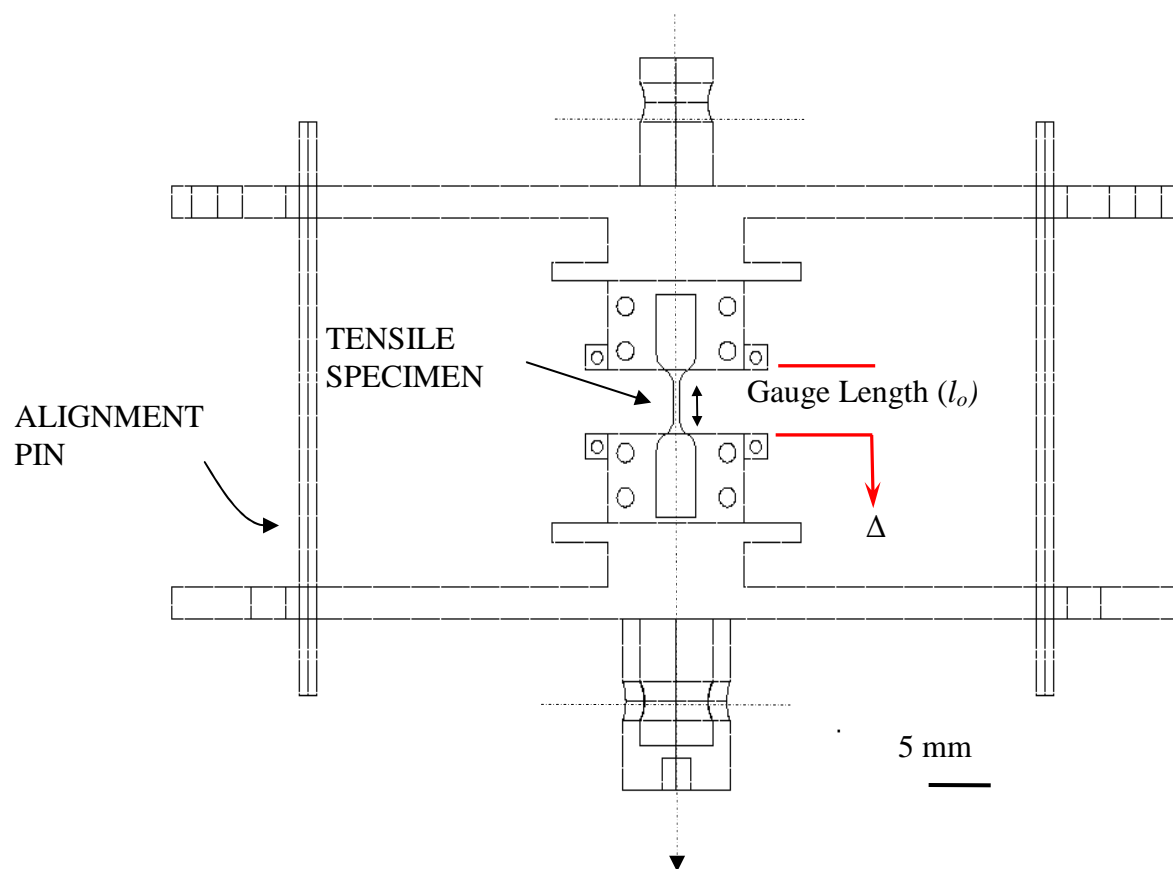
Auxiliary test fixture used in the tension testing set-up. Δ is the machine crosshead displacement.
